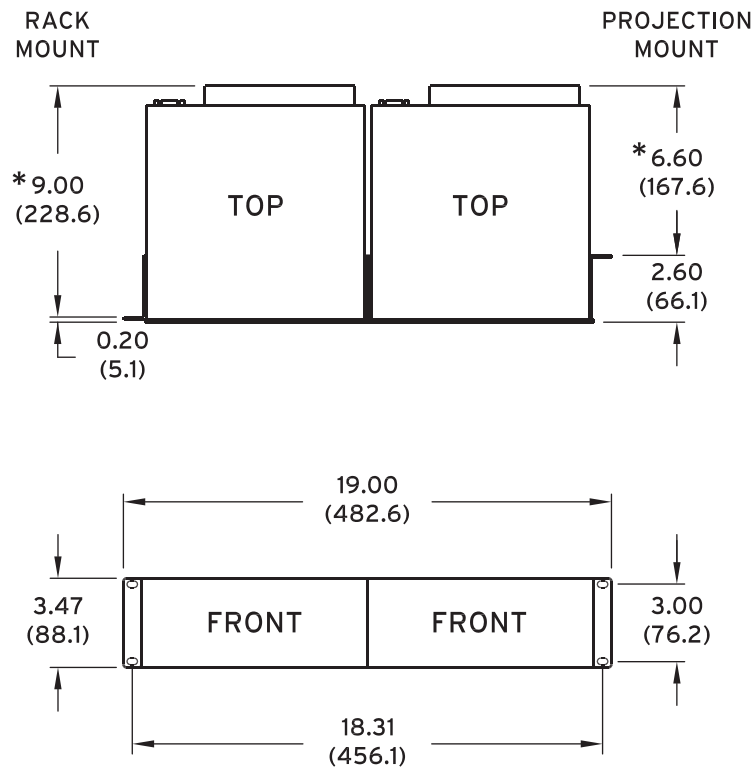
SEL-501 Dimensions and Drill Plan for Single Rack-Mounted Relay
